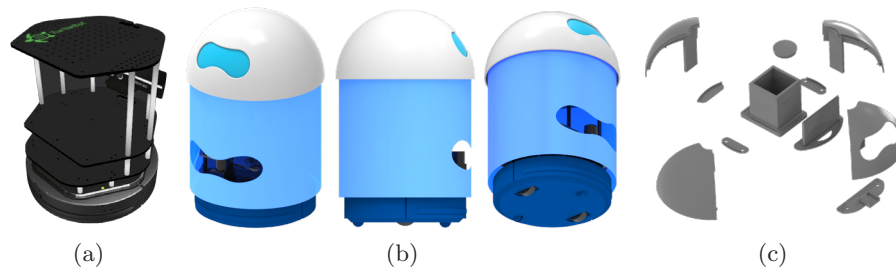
3D models of original Turtlebot 2 (a), housing designed in this project, from different points of view (b) and 3D printed pieces, including housing parts and support pieces to hold sensors and LEDs (c).
